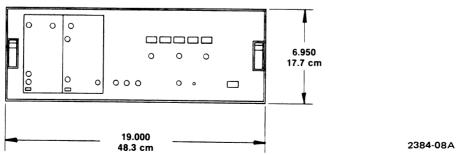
7912AD outside dimensions shown in both inches and centimeters.
